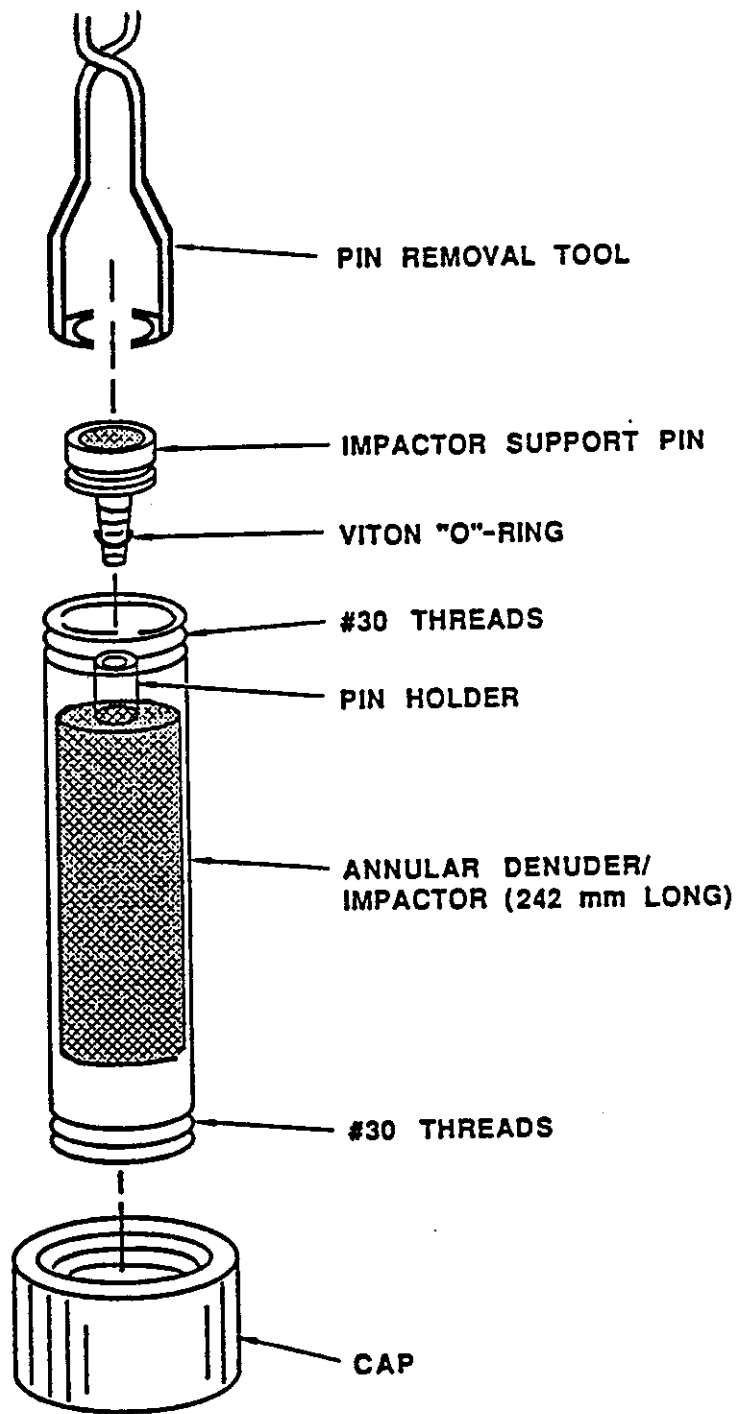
Glass Annular Denuder with Inset Impactor Assembly
